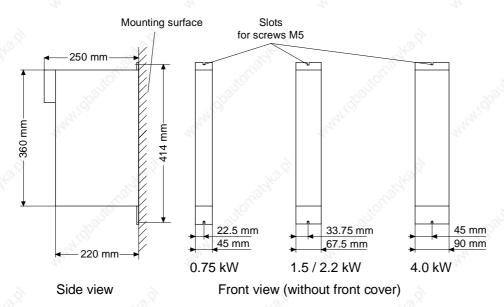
Dimension drawings for housings up to 90 mm wide
